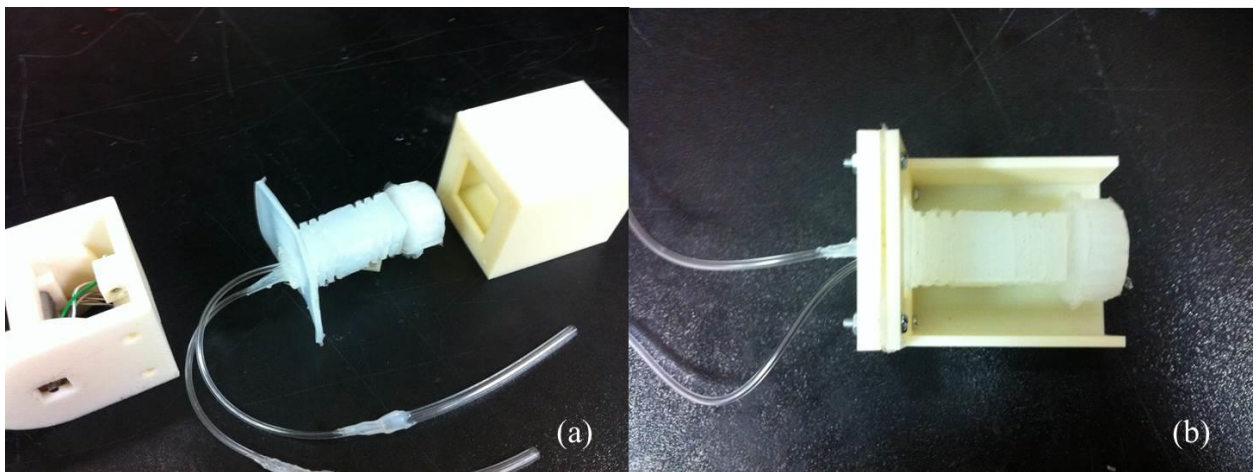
Male Port, (a) Before Assembly; (b) After Assembly
